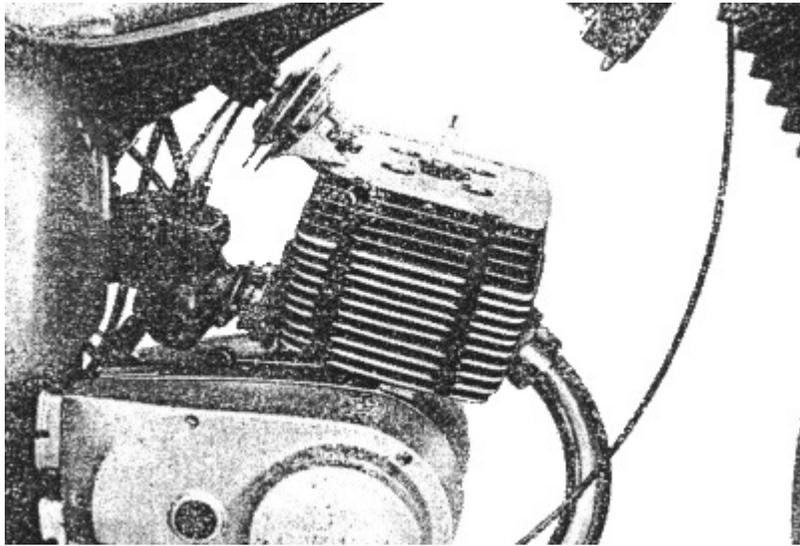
Replacement of the elastic engine suspension at the cylinder cover
